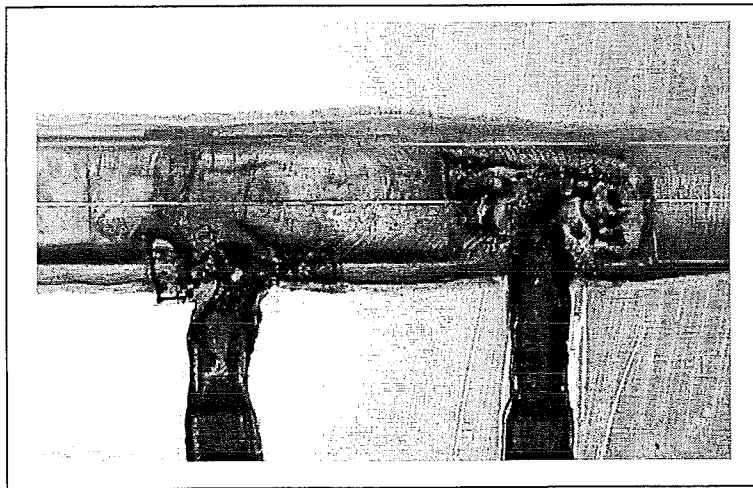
Thermocouple position to measure the temperature of the weld pool at the backside of the AA 6082 specimen.
